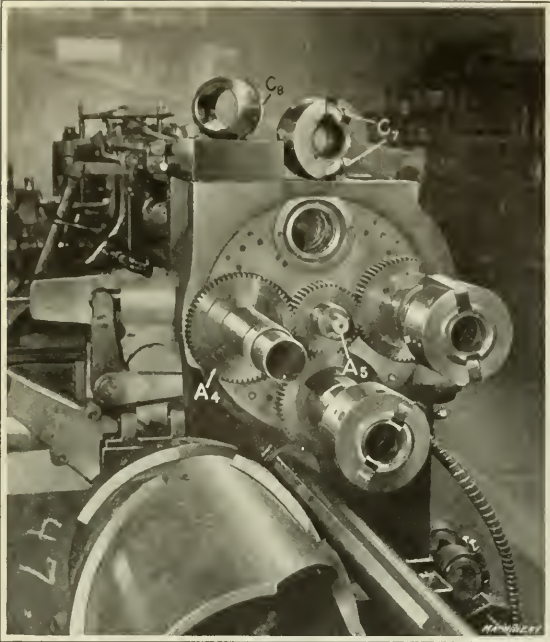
Detailed View of Spindle Carrier, showing Bearings and Oil Retaining Sleeve removed
